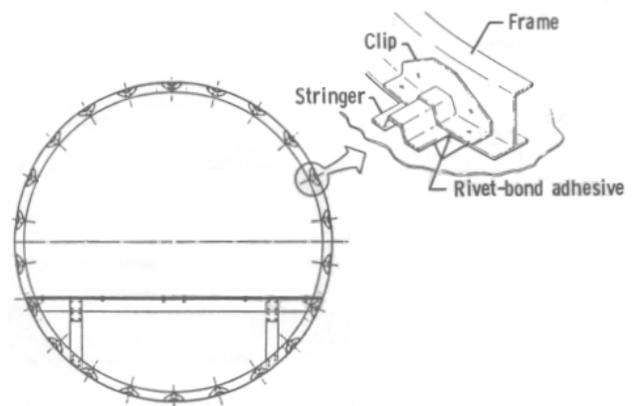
Cross-section of the stiffened, floor-equipped composite cylinder and a detailed view of the rivet-bonded frame-stringer-shell intersection.
